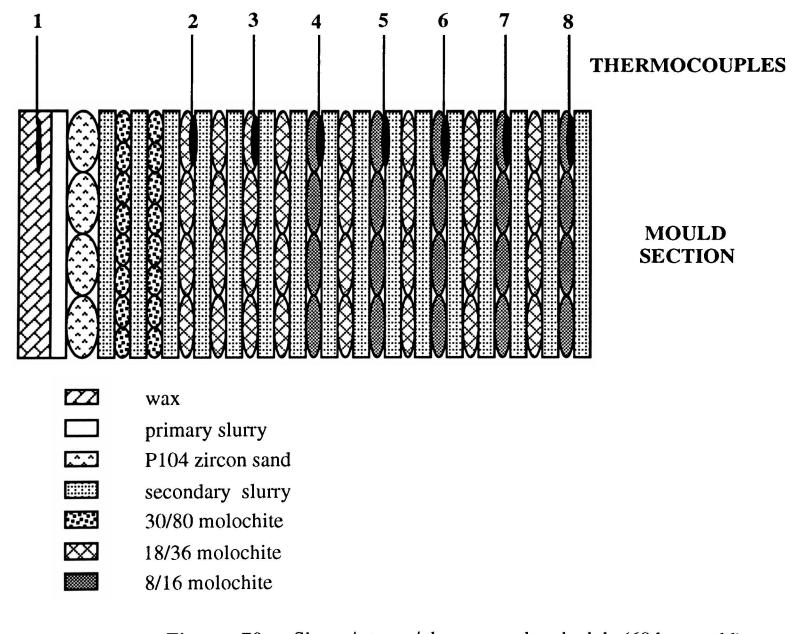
Slurry / stucco/ thermocouple schedule (60 kg mould)
